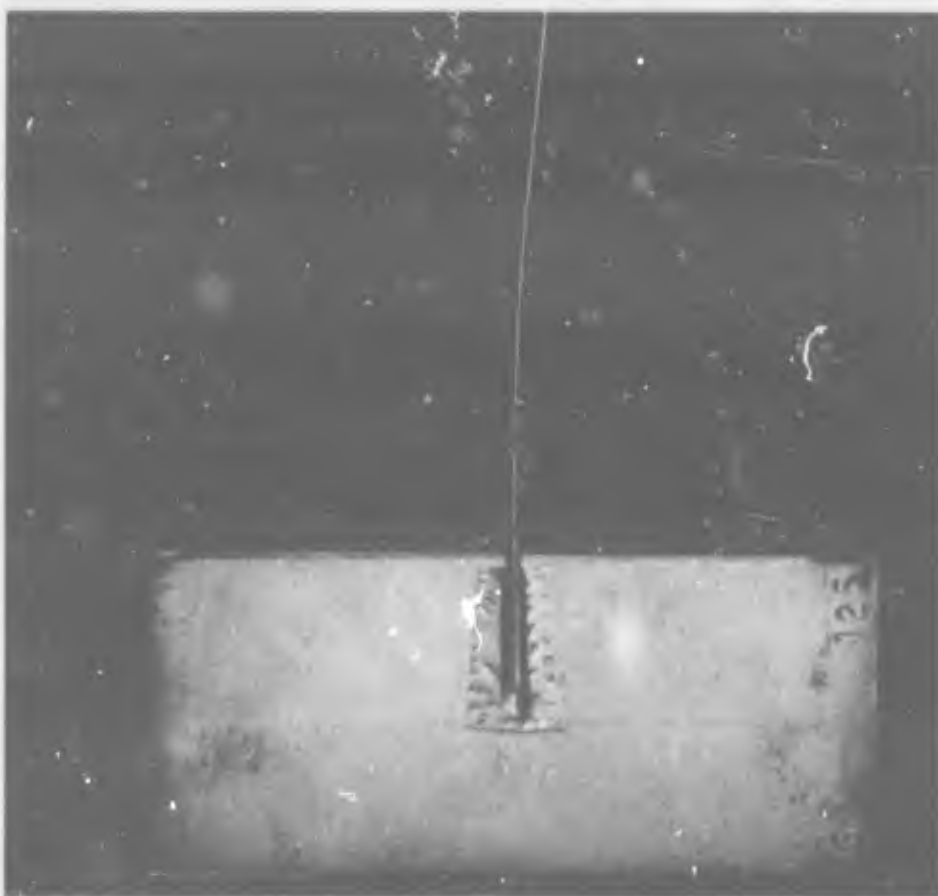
Thermocouple Attached to the Bend Line of a Specimen by Spot Welding
